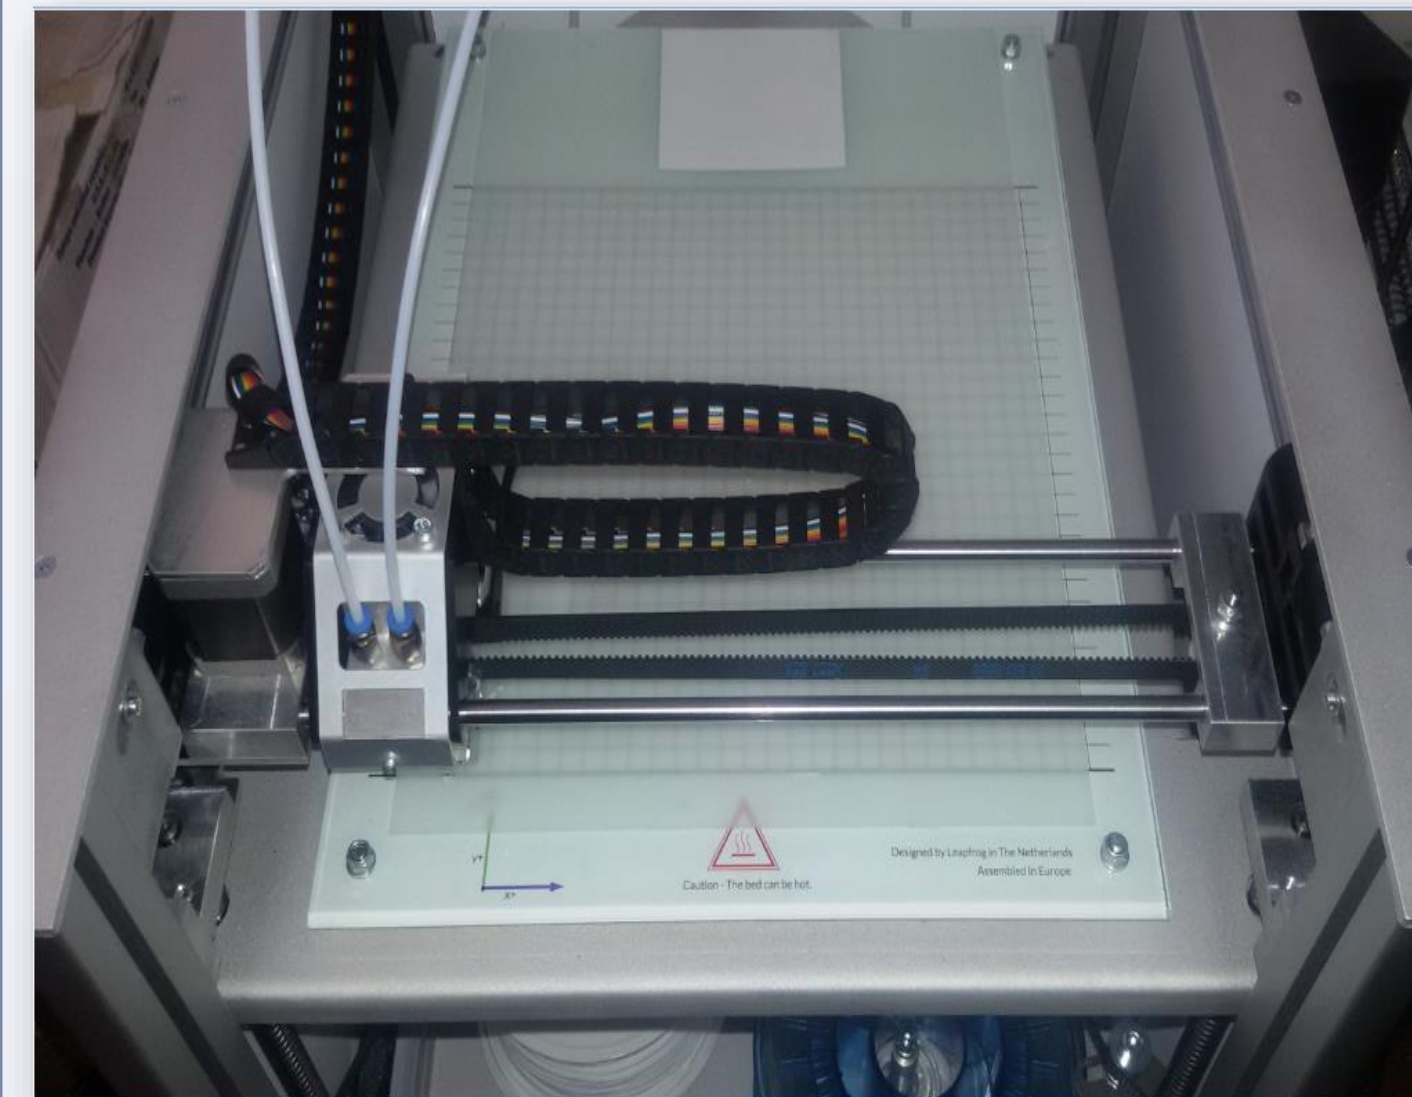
3D printer with 2 extrusion heads, Center for Information Technology (CIT), Faculty of Engineering, Kragujevac
